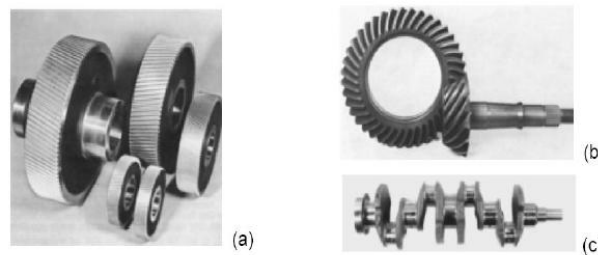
Examples of parts: (a) gear in ADI, (b) crown and pinion of General Motors and (c) turbo engine crankshaft Ford (SORELMETAL, 2002).
